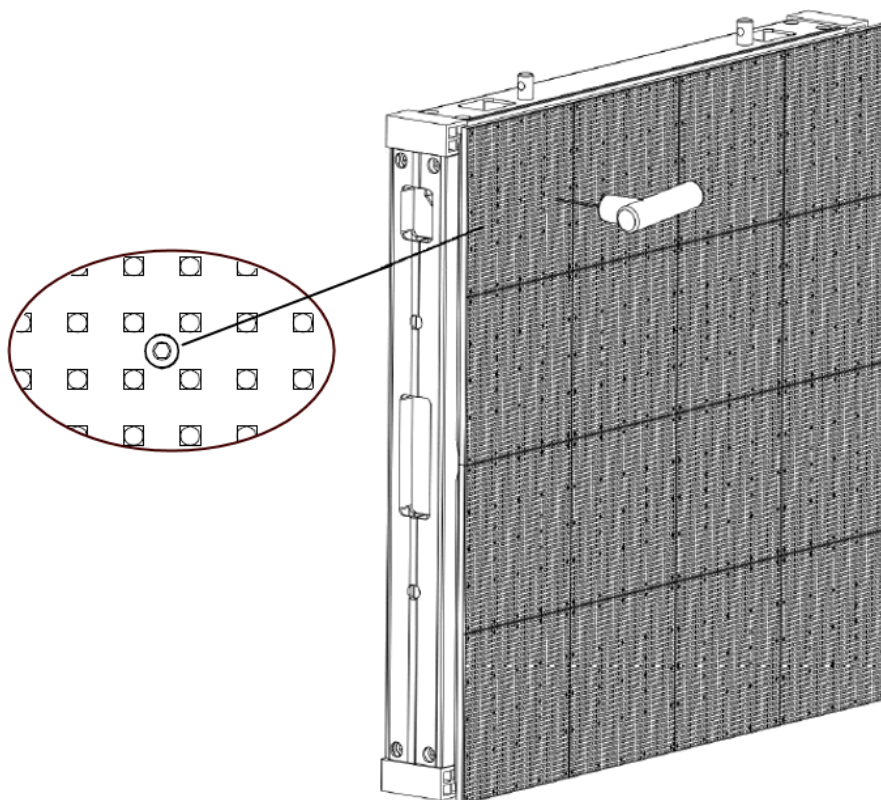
Disassemble Lamp Board with Hex Wrench
